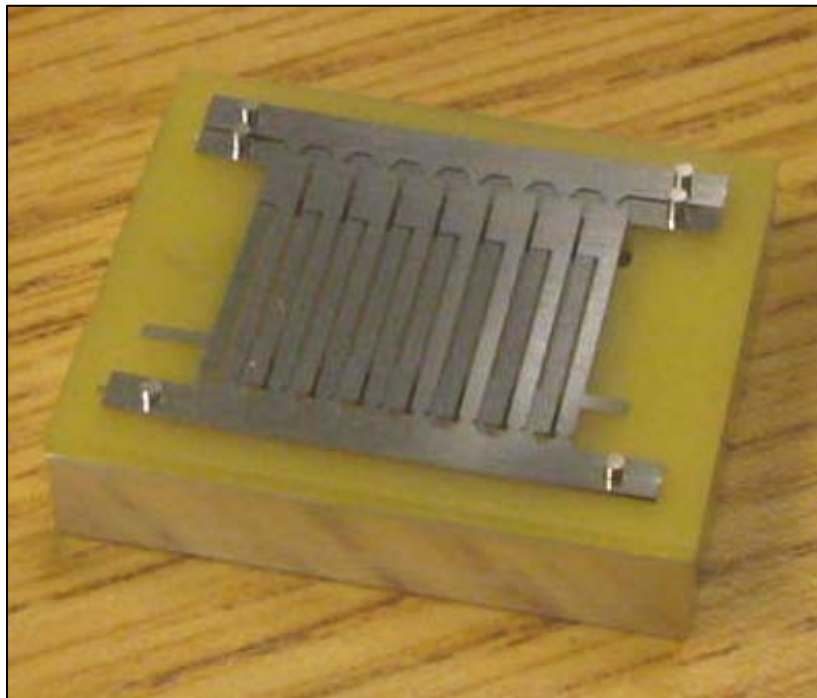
Practice parts (300 series stainless steel) on spot welding fixture.
